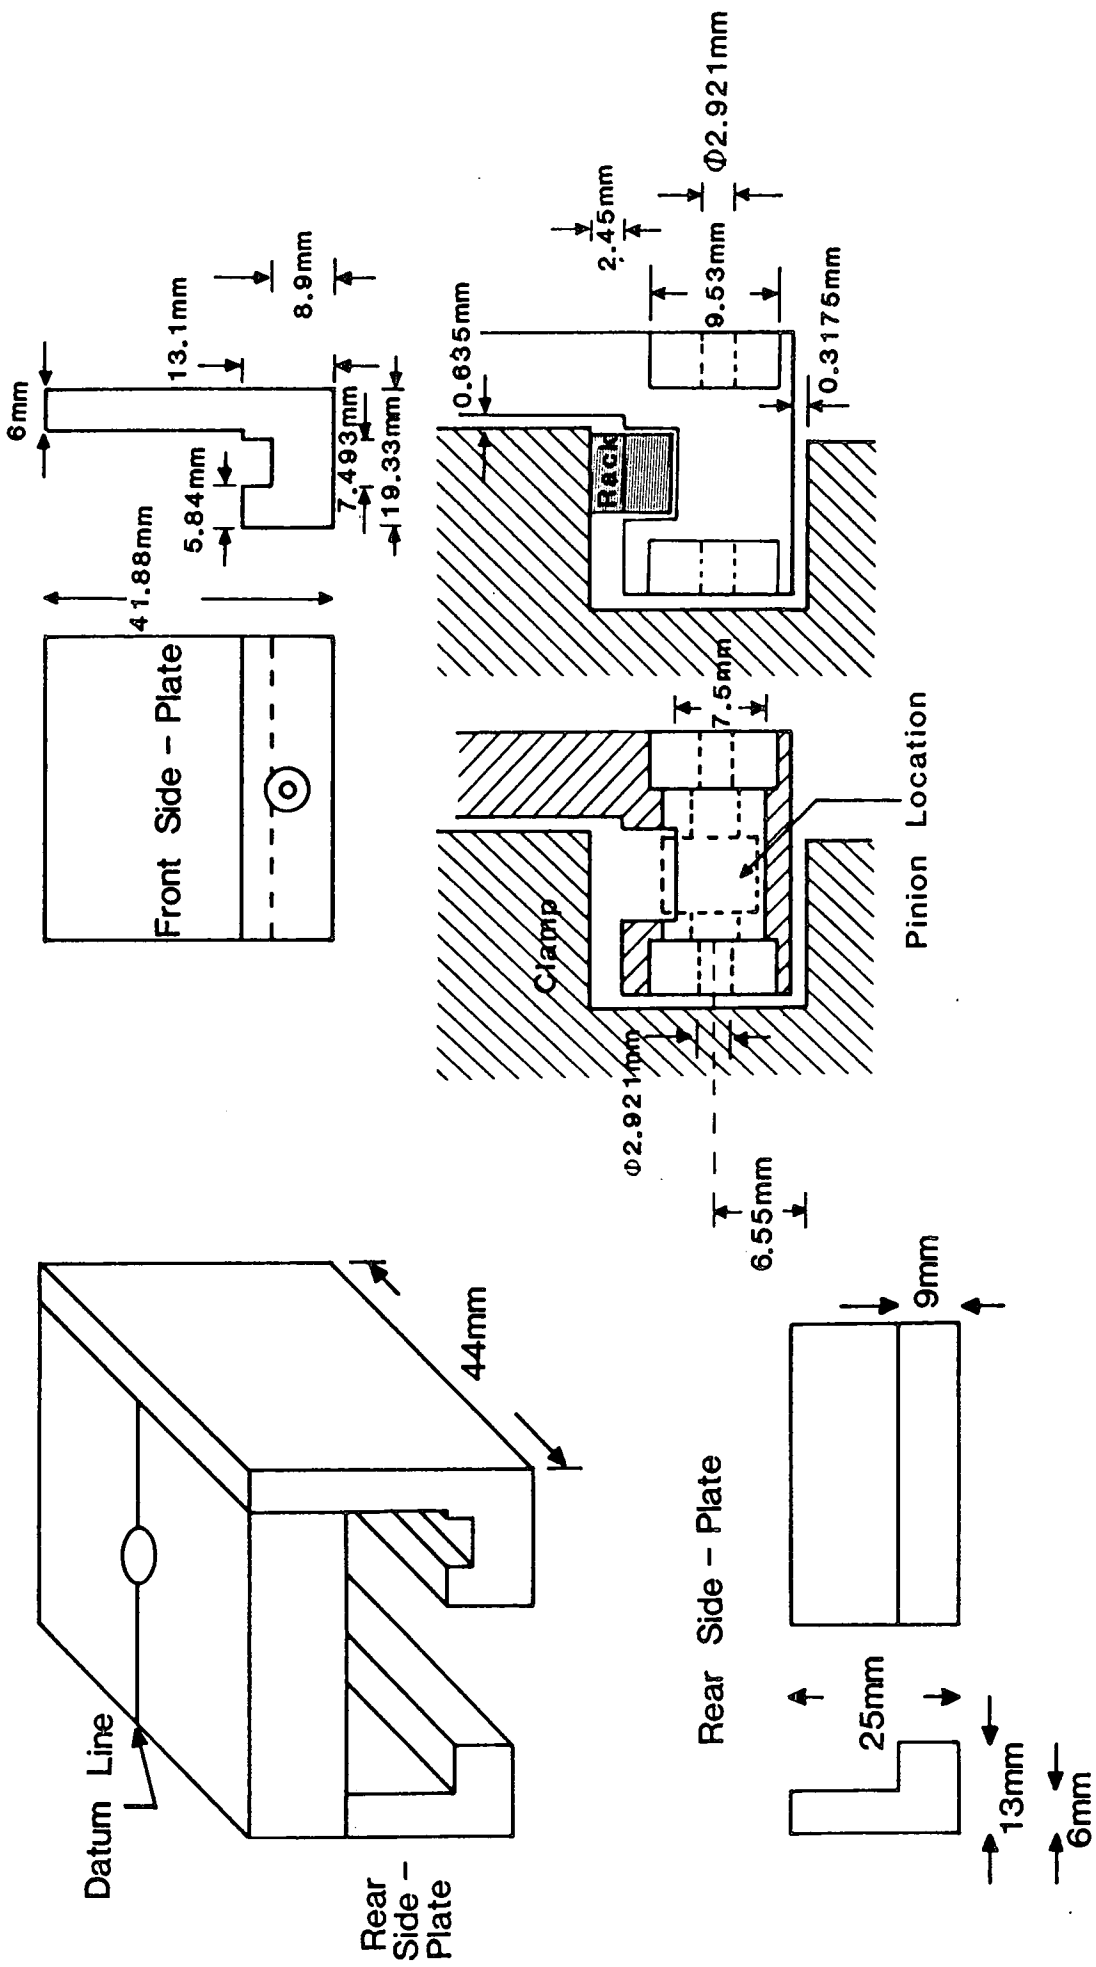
Cross - Sectional View of the Carriage Side Plate.
